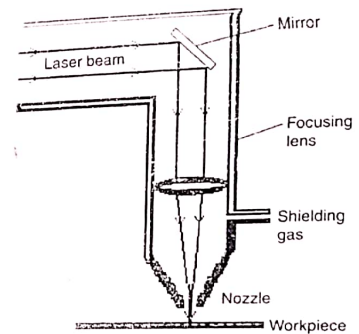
Schematic diagram for beam focusing head design for laser welding.
